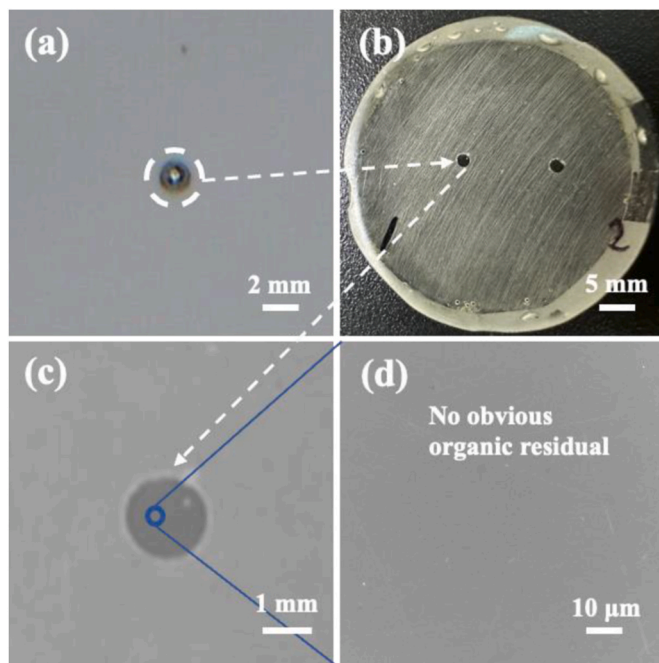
(a) the actual solder ball formed after soldering, (b) the cross-sectional sample of the solder ball, (c) the enlarged drawing of (b), and (d) the SEM of the cross-sectional microstructure of the solder ball.
